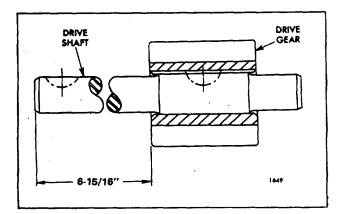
Oil Pump Drive Shaft and Gear Assembly.
